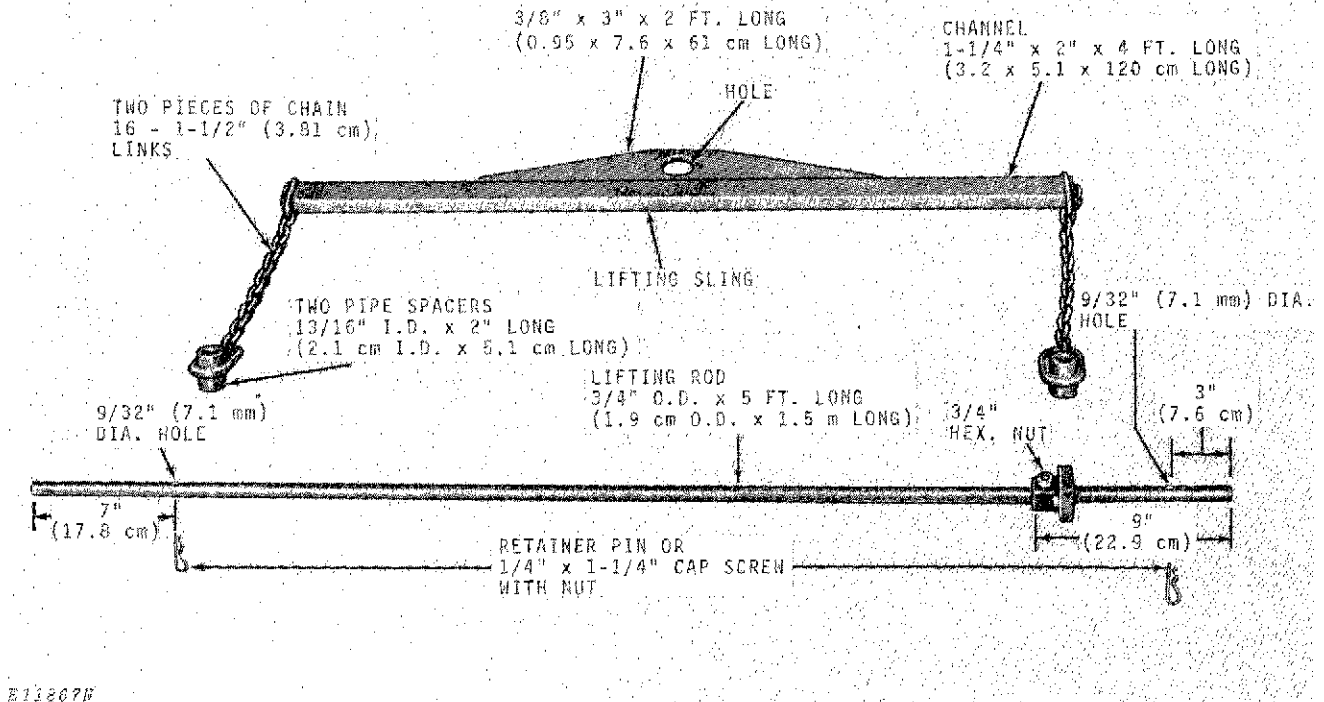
Making Operator's Cab Lifting Rod and Sling
